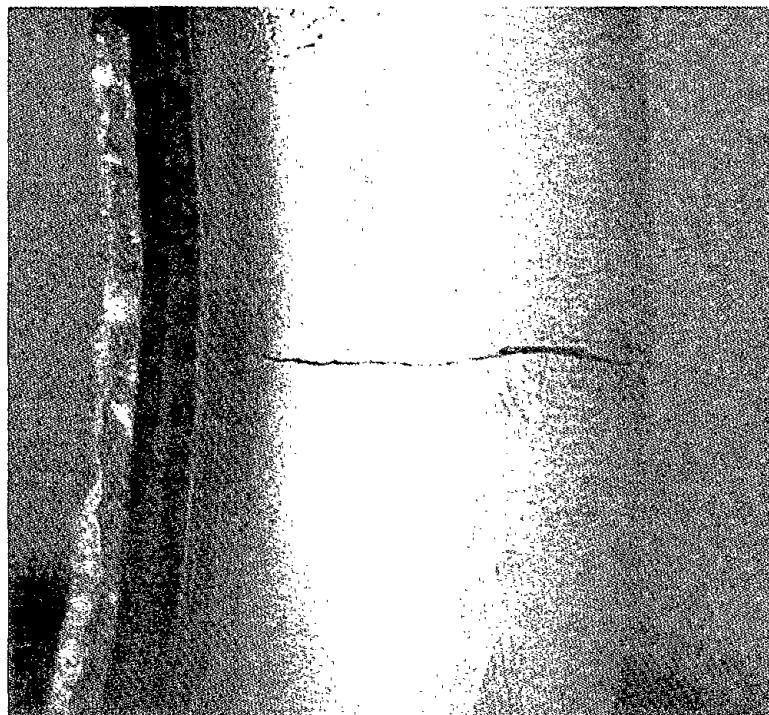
Photograph of a Crack in the Edge Tube Bend Section Removed from a Panel
